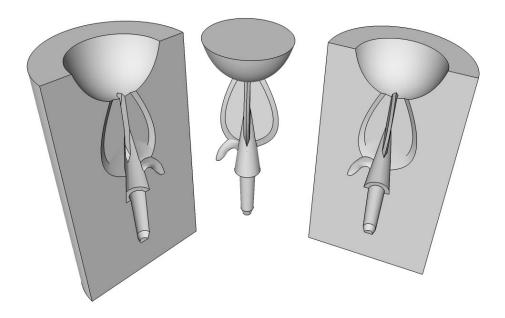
A hypothetical two-part quadrilobate mold, with casting.
